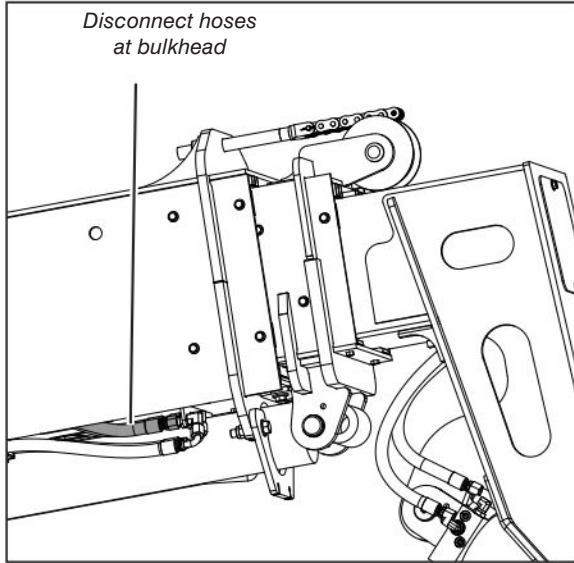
Fork Tilt Hoses Removal at Bulkhead
